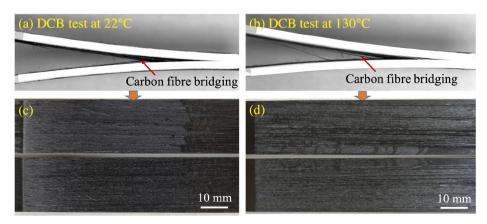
(a) and (b): side-view images of the DCB specimens of the CF/PEEK bonded joints during the test, and (c) and (d): photographs of the corresponding mode-I fracture surfaces.
